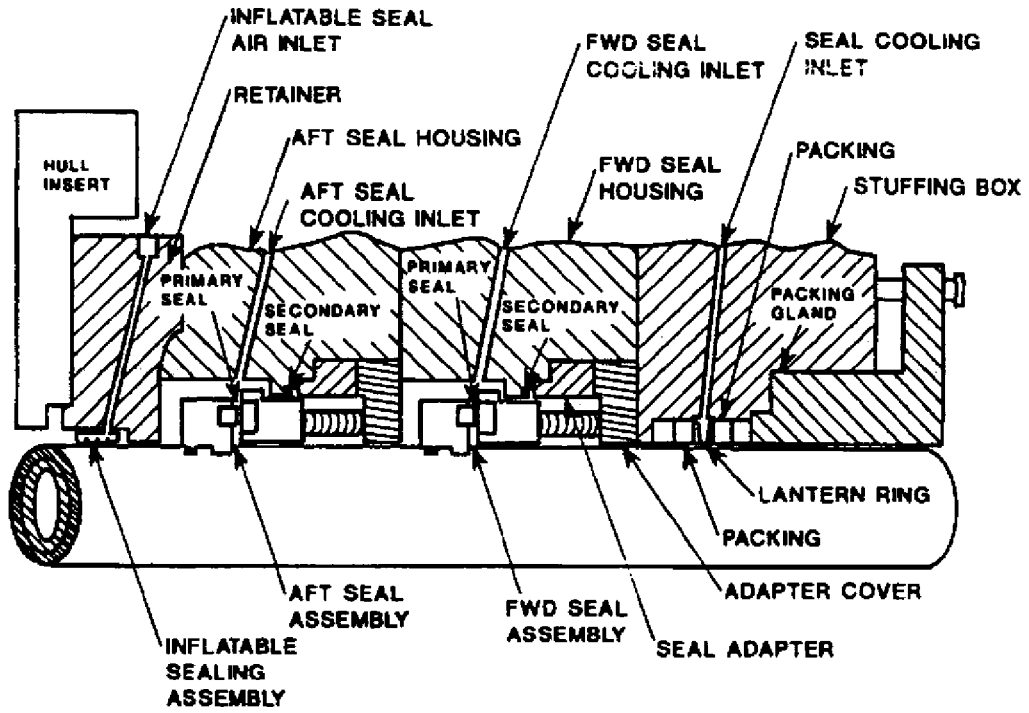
Typical Detail of Submarine Stern Tube Seal Assembly
